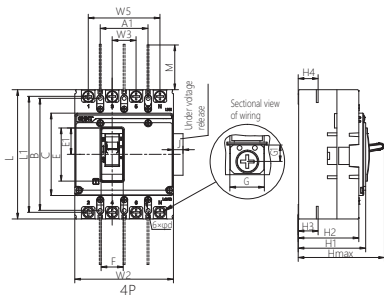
NXM-63~250 front-panel wiring overall and installation dimension
